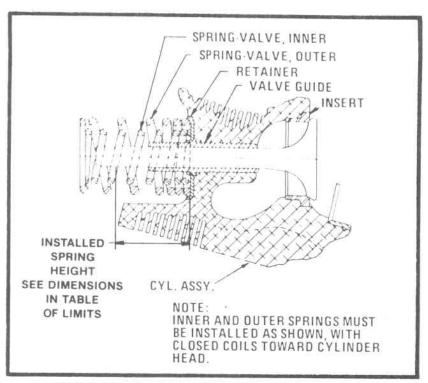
VALVE SPRING INSTALLATION.
